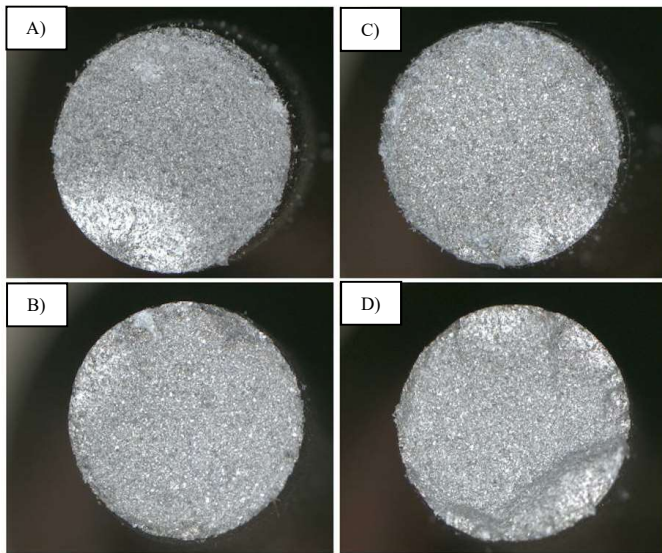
Approximately 12x original magnification macrographs of fatigue fracture surfaces. A) Standard B) Combined C) Common D) Improved Performance
